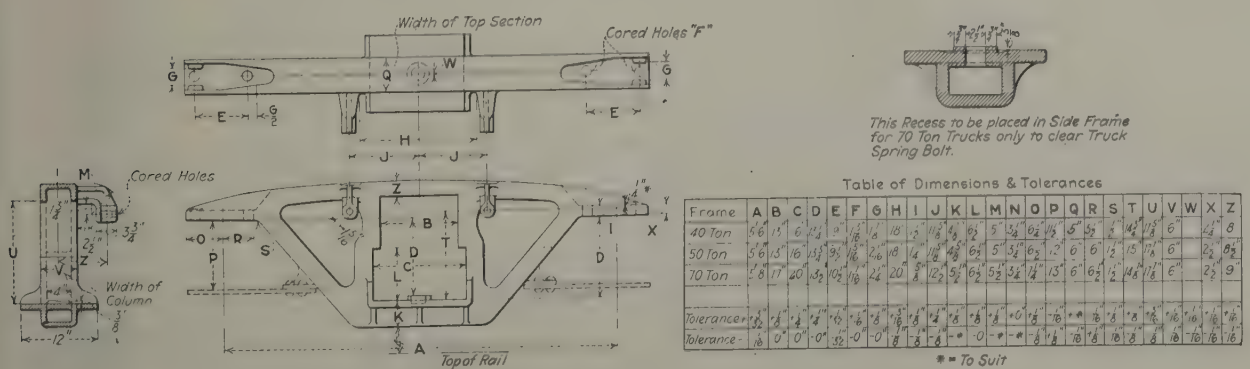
Limiting Dimensions of Side Frames for U. S. R. A. Standard Trucks.
